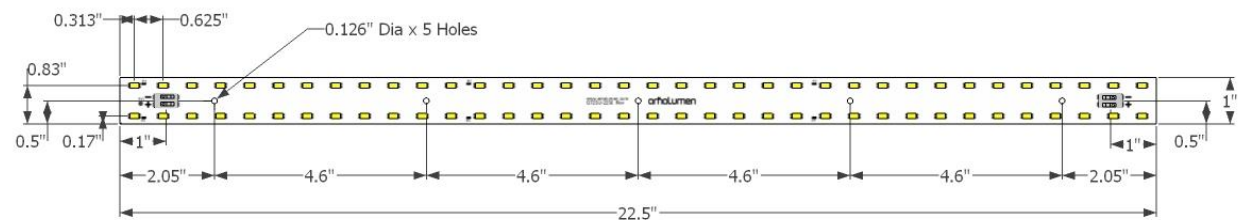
Q72SA-36V-2252 Mechanical Drawing
